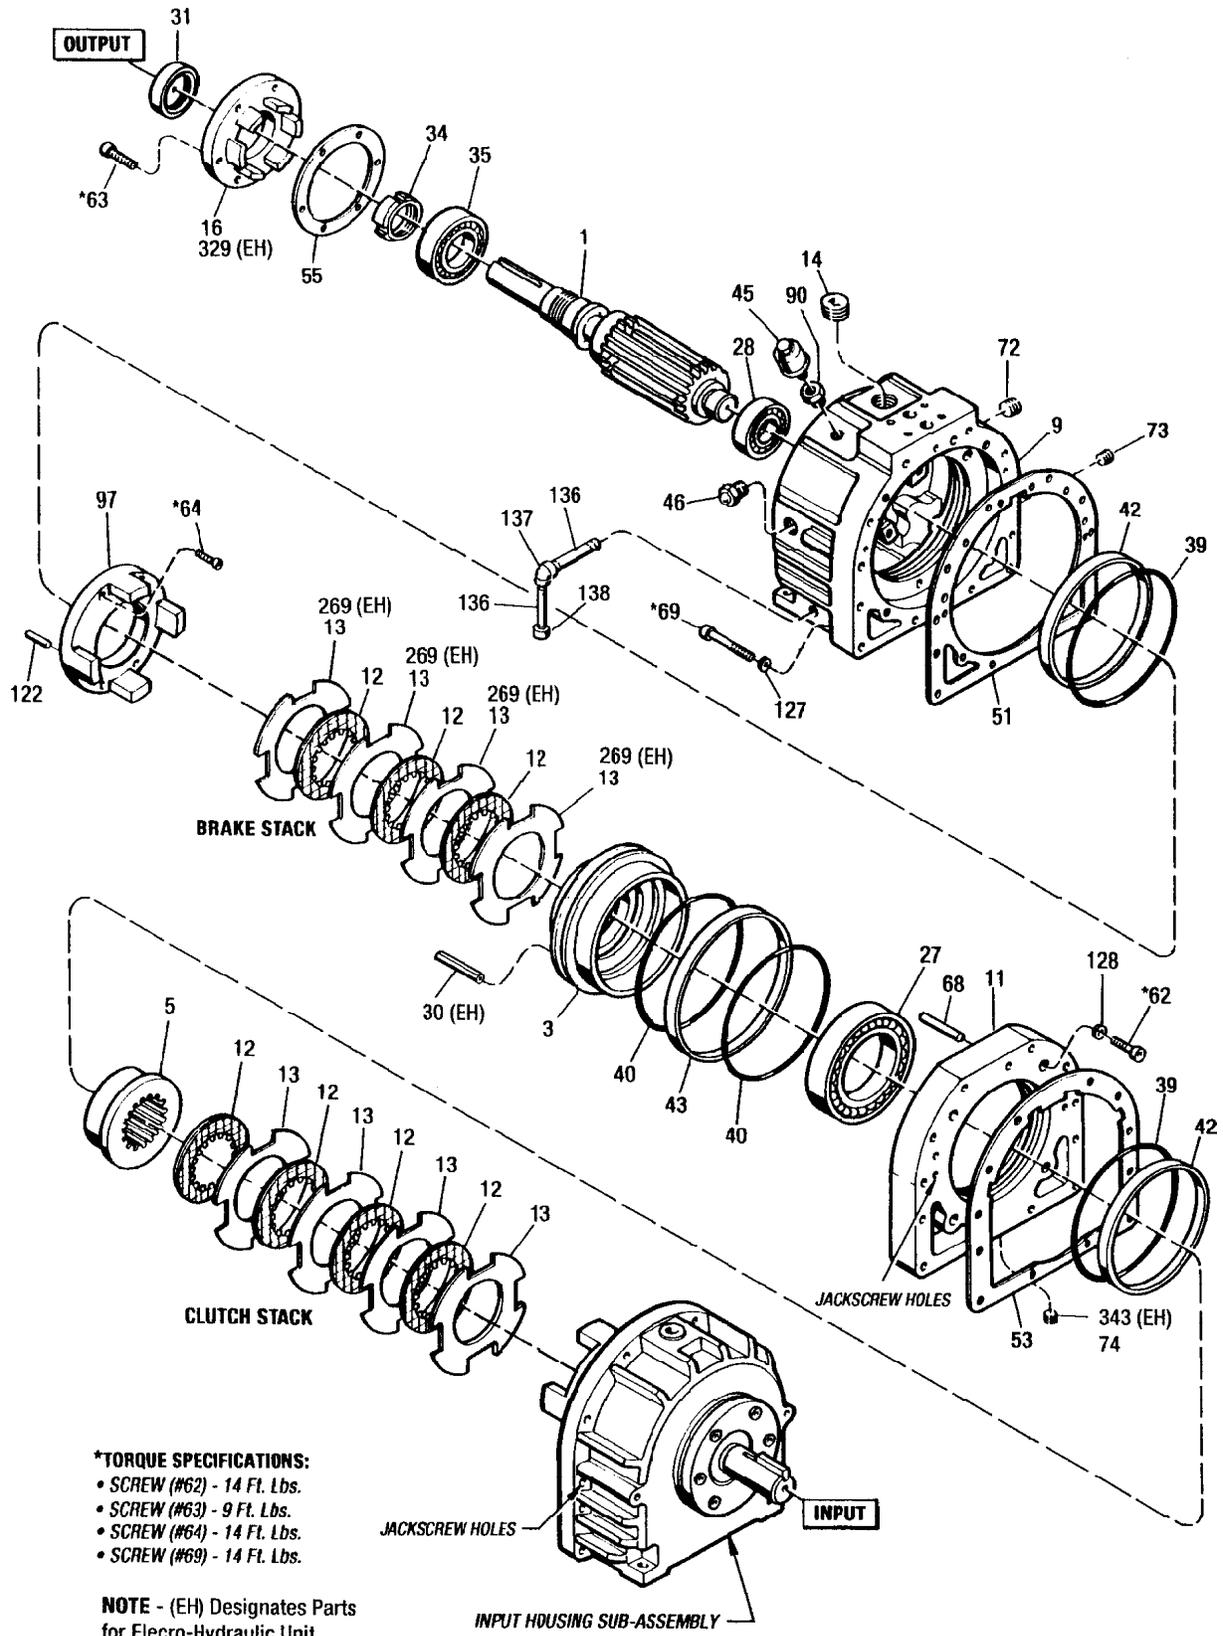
2.5 Posidyne Clutch and Brake Unit
